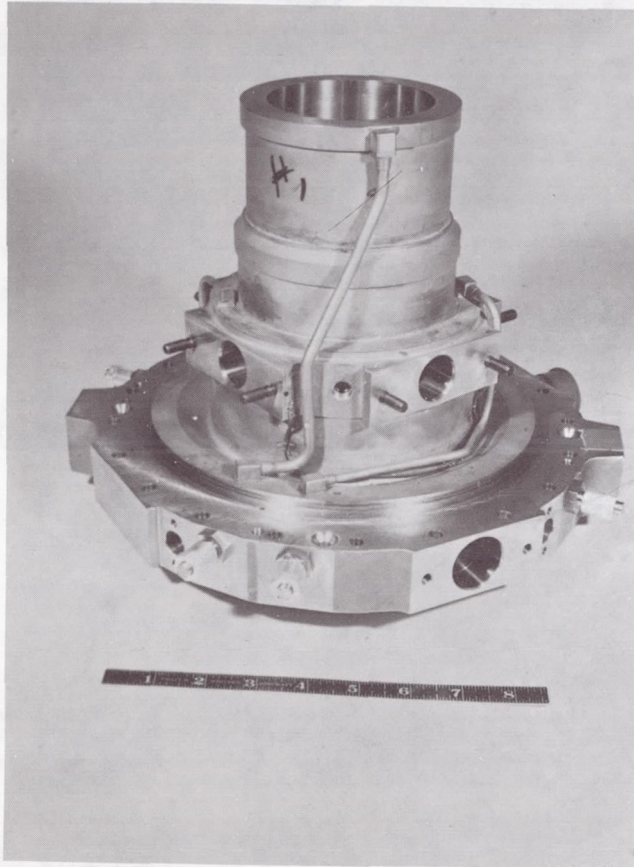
Thermocouples on Number One Bearing Mount Ring (X-25653 & X-25654)
